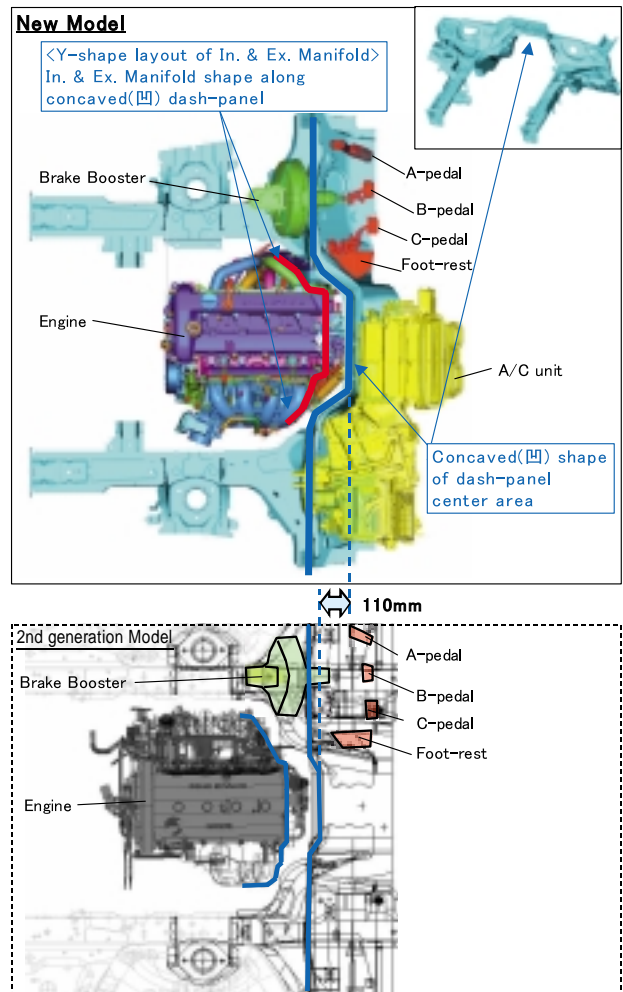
Y-Shape Layout of In. and Ex. Manifold
